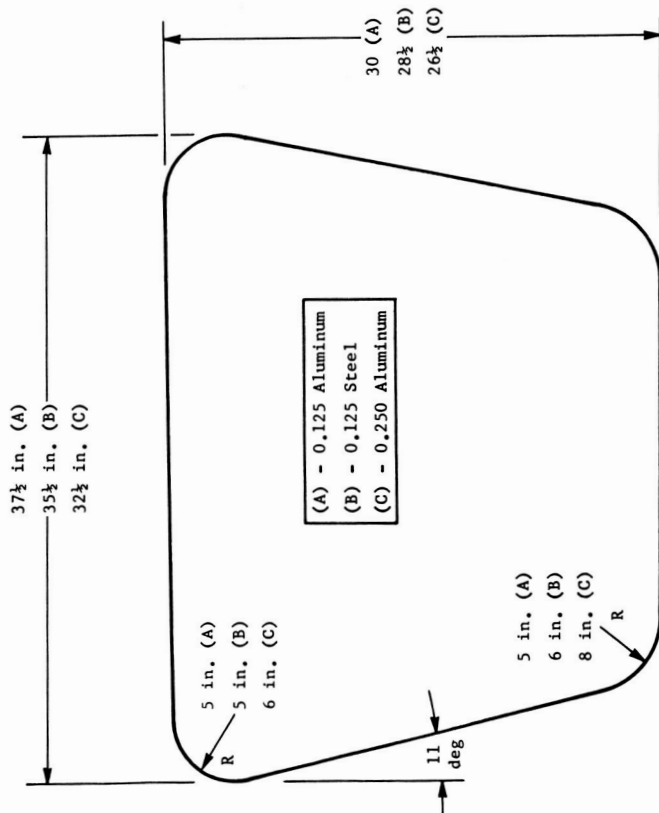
Optimum Blank Dimensions for Male Explosive-Forming Technique
